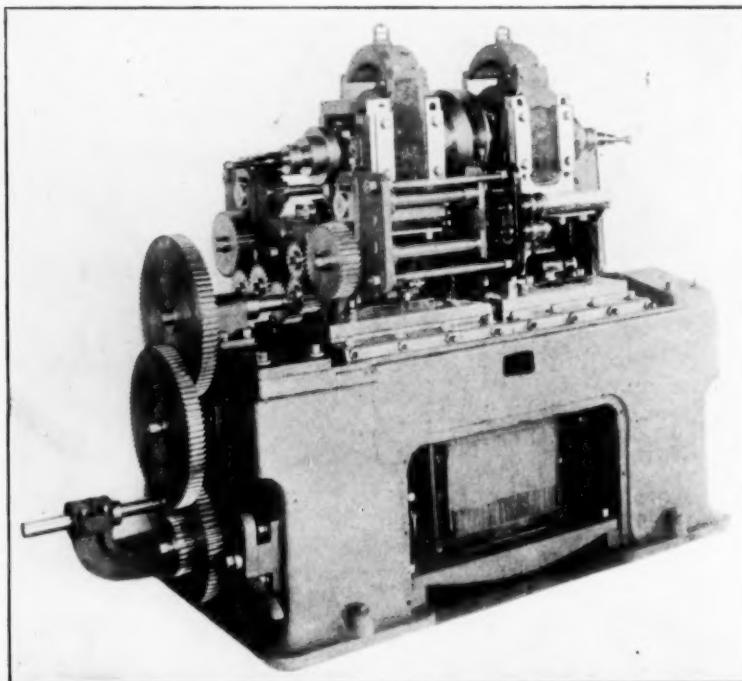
MACHINE FOR ELECTRIC WELDING SEAMLESS TUBING
